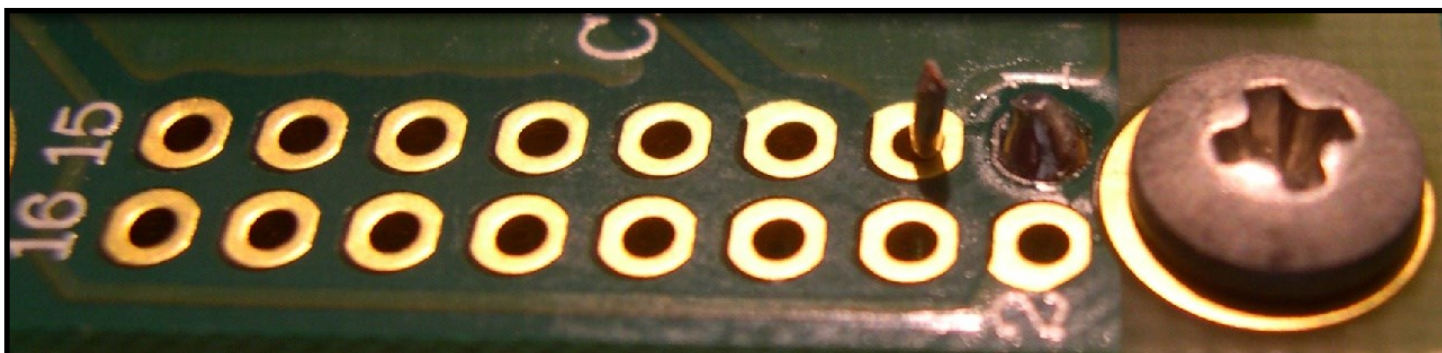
Soldering 22g hook-up wire as header pins for the LCD Display.
